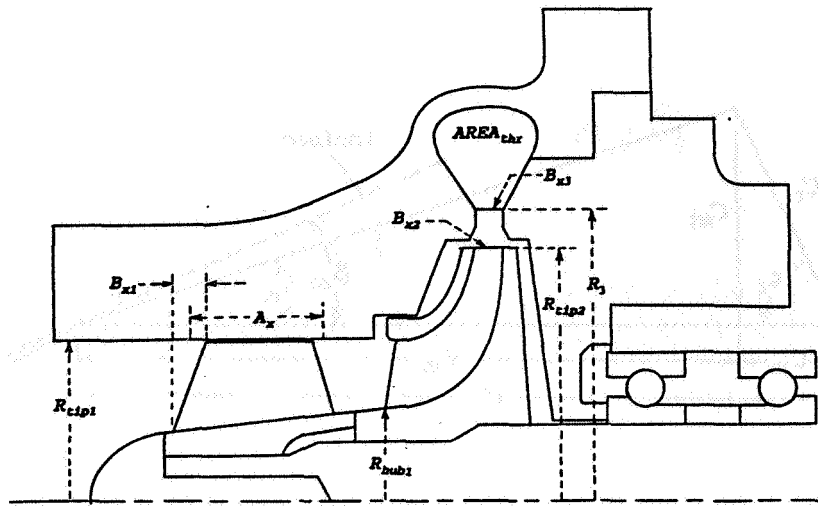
Pump Stage with Axial Inducer and Centrifugal Impeller.
